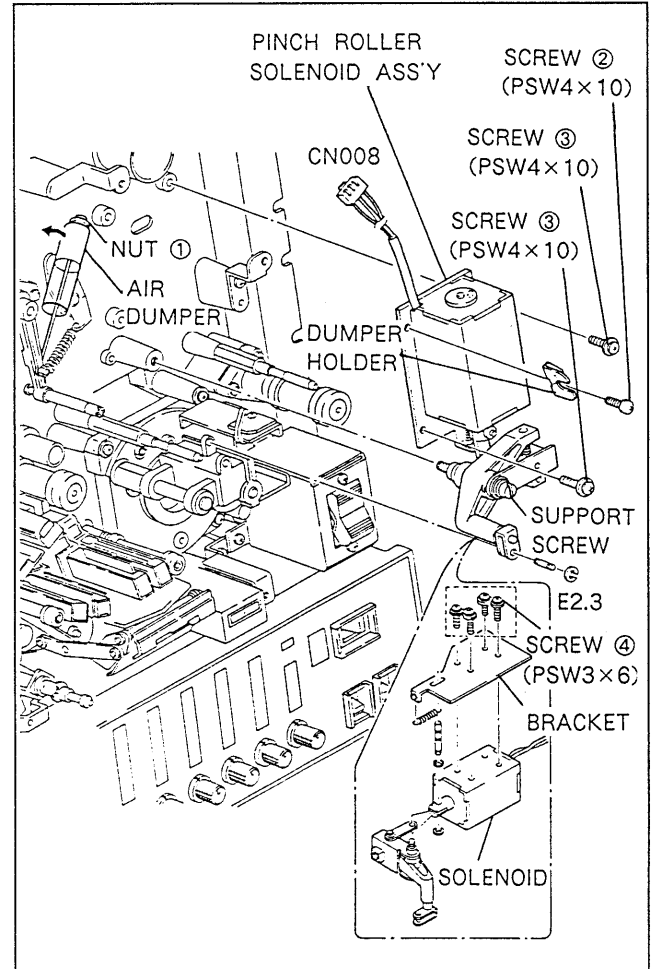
Pinch Roller Solenoid Replacement
